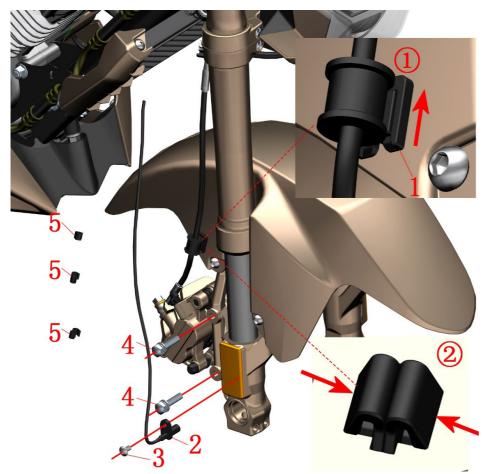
FF	RONT FORK	Front wheel speed sensor assembly	CHK
